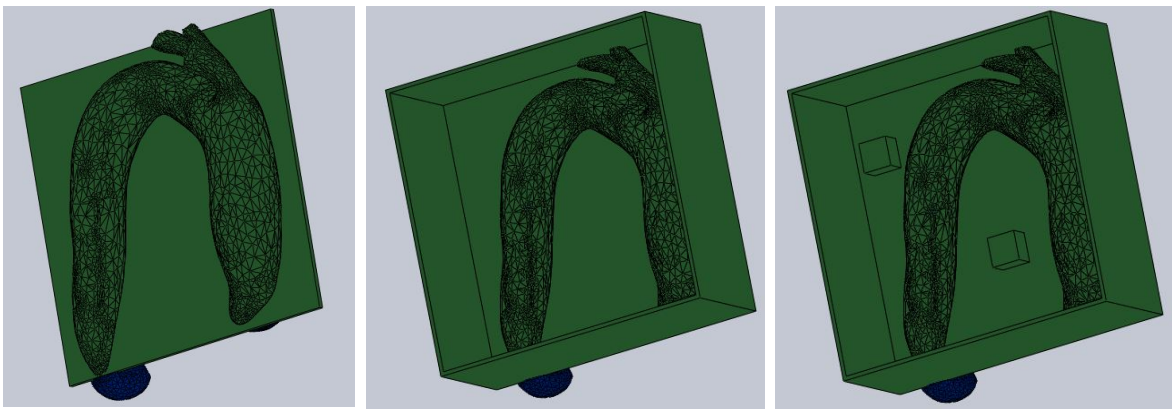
The sequence of creating the 3D printed box with alignment pins for Part A in SolidWorks.
